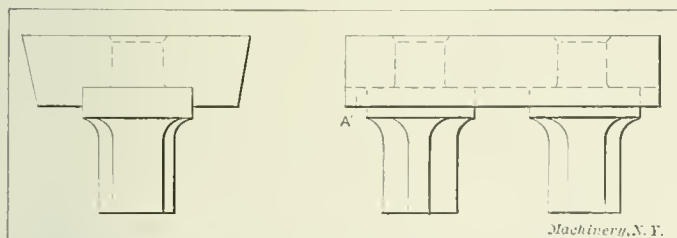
Punch Holder with Two Blanking Punches attached in a Similar Manner
